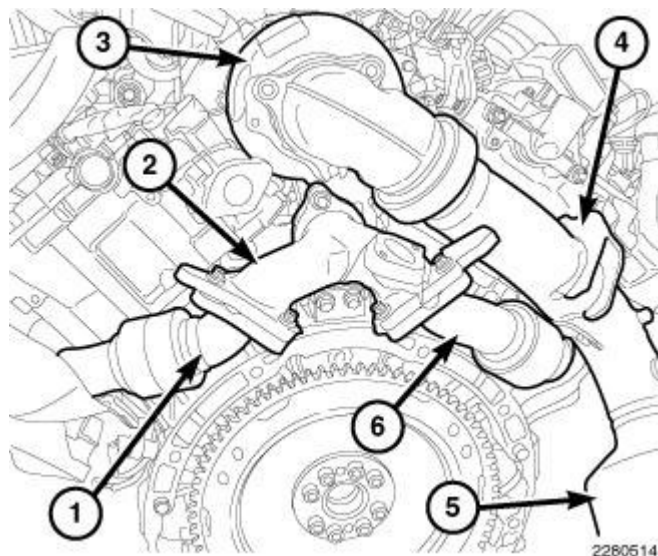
EXHAUST MANIFOLD & TURBOCHARGER MANIFOLD
